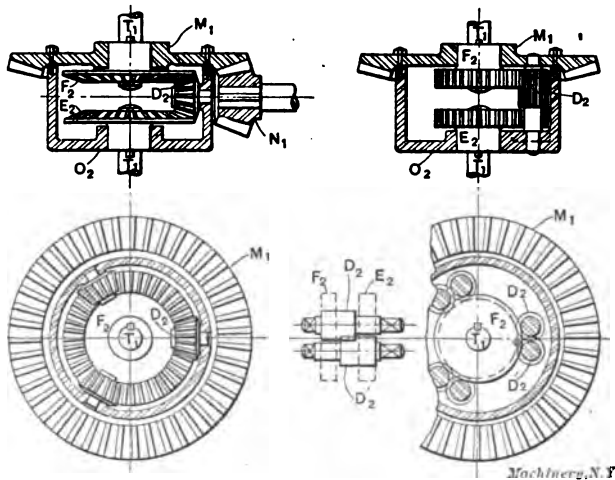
Sketch showing Principle of the Bevel and Spur Gear Types of Differential Gearing
